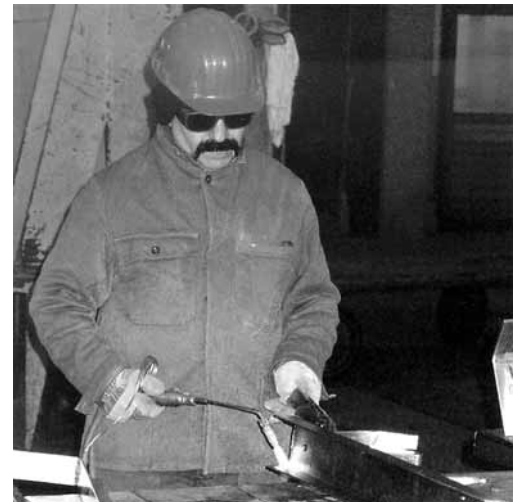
Gas welder fettling a work piece, with welding goggles (protection class 4 to 7 to EN 169) and ear protection.
